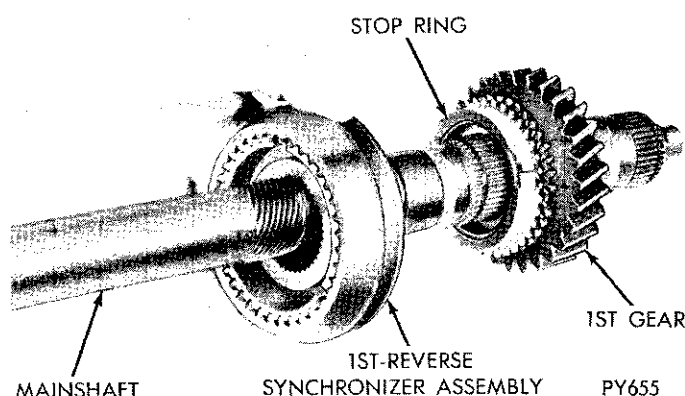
1st-Reverse Synchronizer Assembly—Removal or Installation
